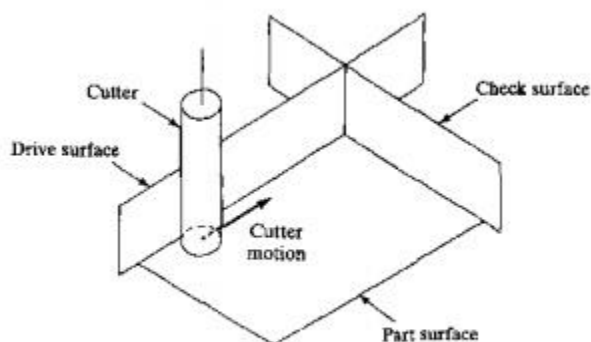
Three surfaces in APT contouring motions that guide the cutting tool.
